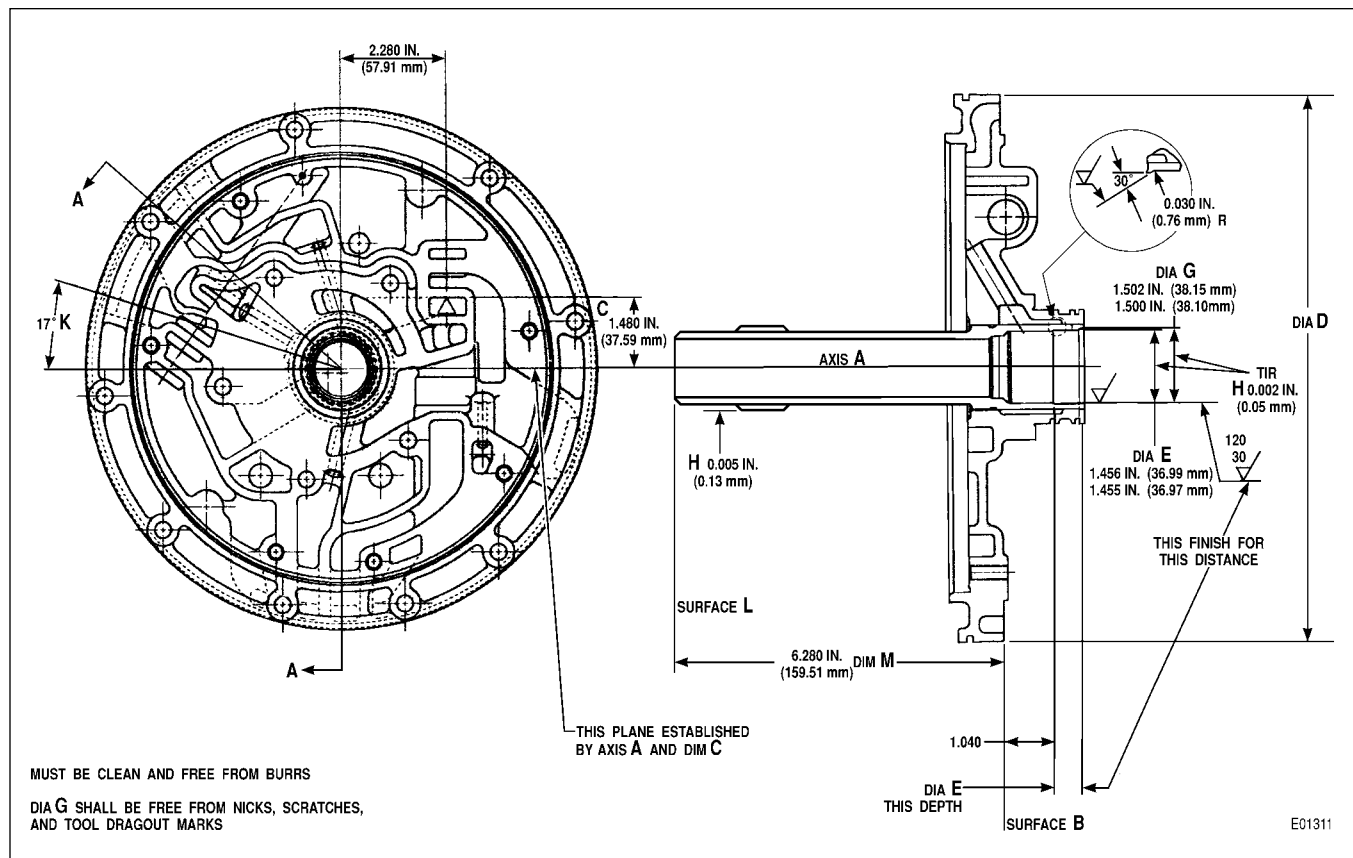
Installation of Stator Shaft (AT 1500 Series)
